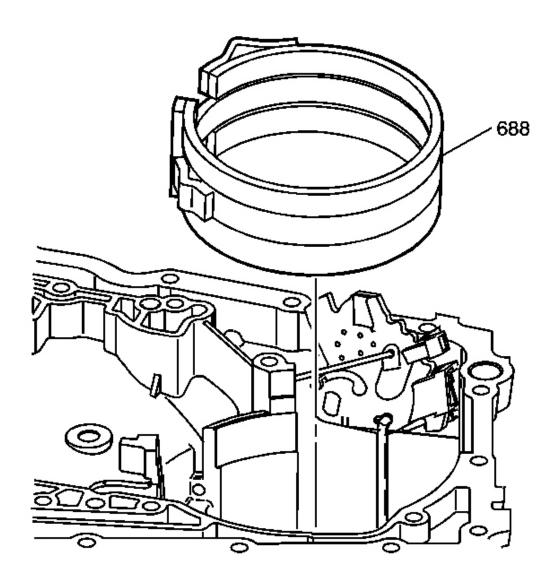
Locating Forward Band Assembly Courtesy of GENERAL MOTORS CORP.
